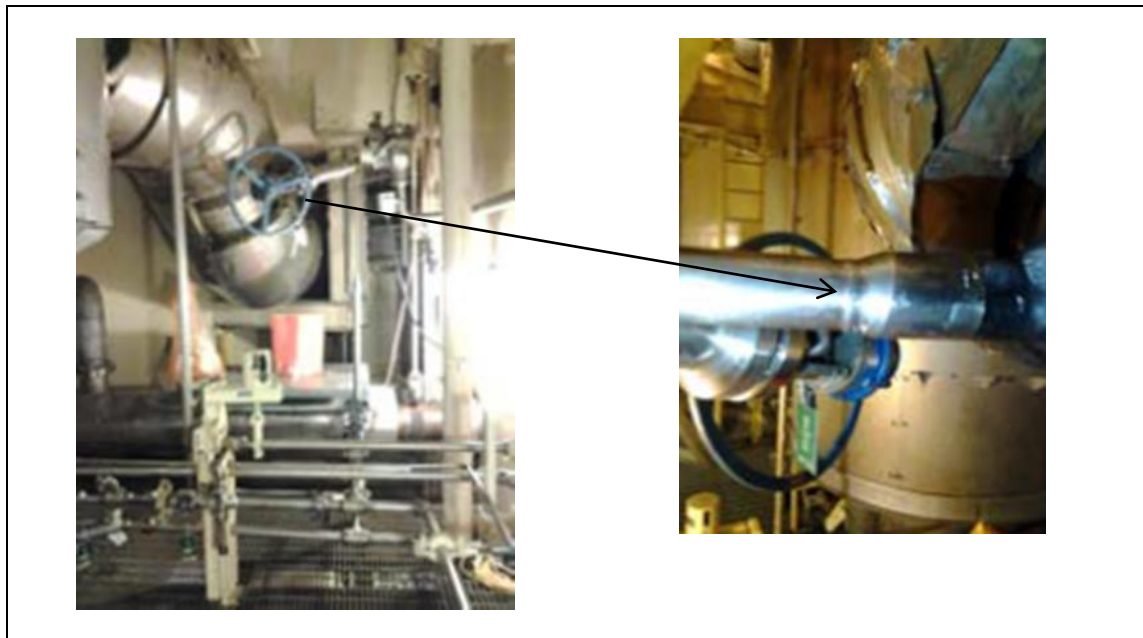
Location of Through-Wall Weld Flaw⁴¹
